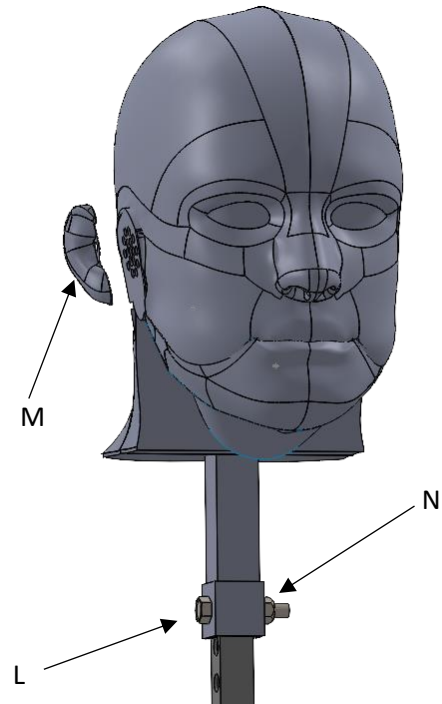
Front view of the mannequin head, showing the jaw closed and the adjustable/exchangeable ears.
